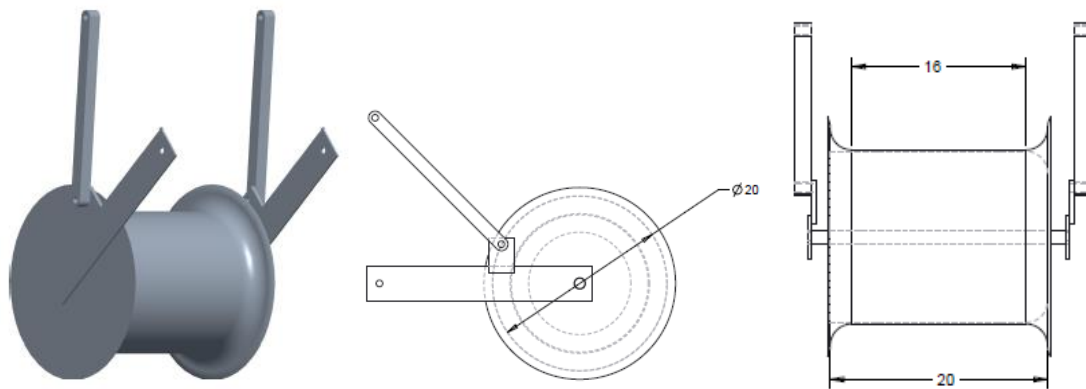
Gauge wheel with four-bar linkage (left), side view (center) and front view (right) schematic (all dimensions in inches)
